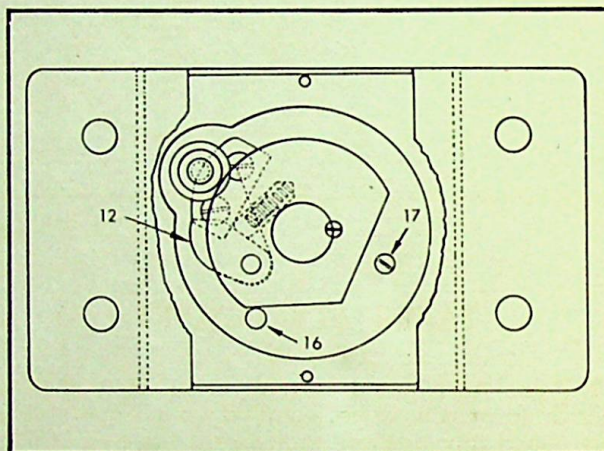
Bottom of Square Turret Showing Arrangement for Hand Indexed Unit
